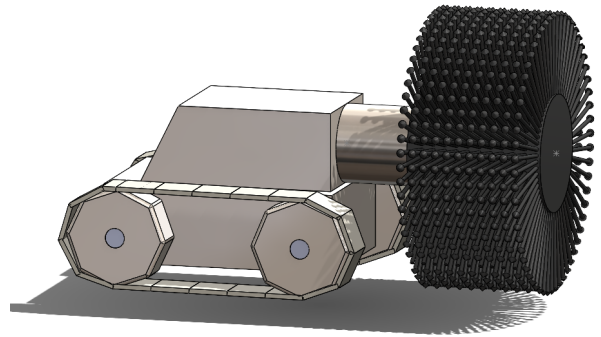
Isometric view of the robot design with a chain track mechanism for enhanced mobility inside vents
